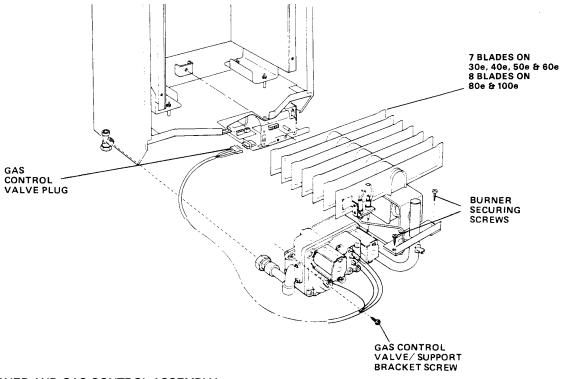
BURNER AND GAS CONTROL ASSEMBLY
